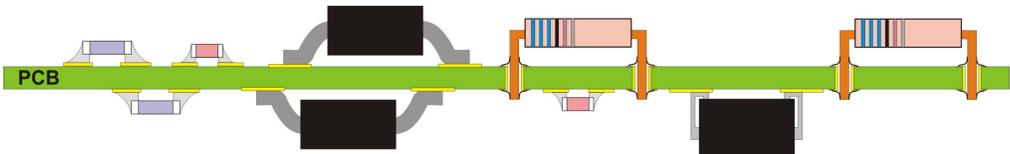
Two-sided PCB with SMD and TH components prepared for reflow soldering
